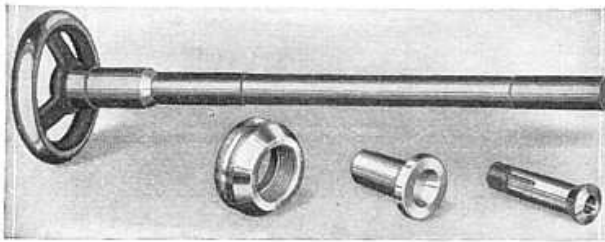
Hand Wheel Draw-in Collet Chuck Attachment Showing Nose Cap, Closing Sleeve, and Collet.
